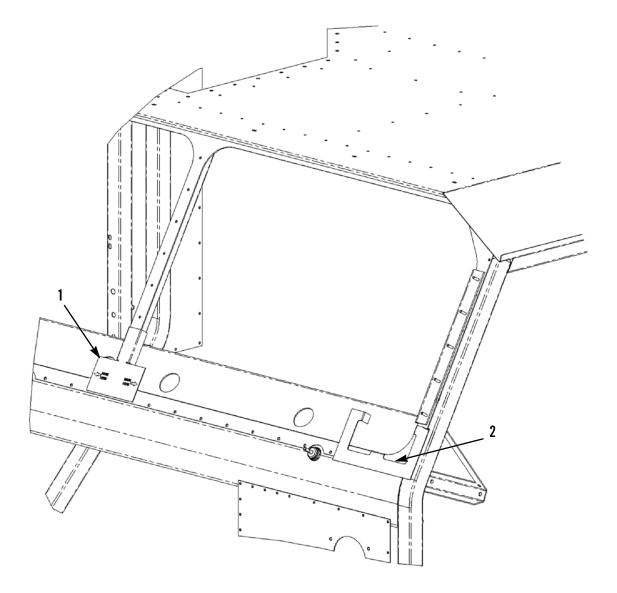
Windshield Armor Kit and Mounting Hardware (Sheet 1 of 2)
